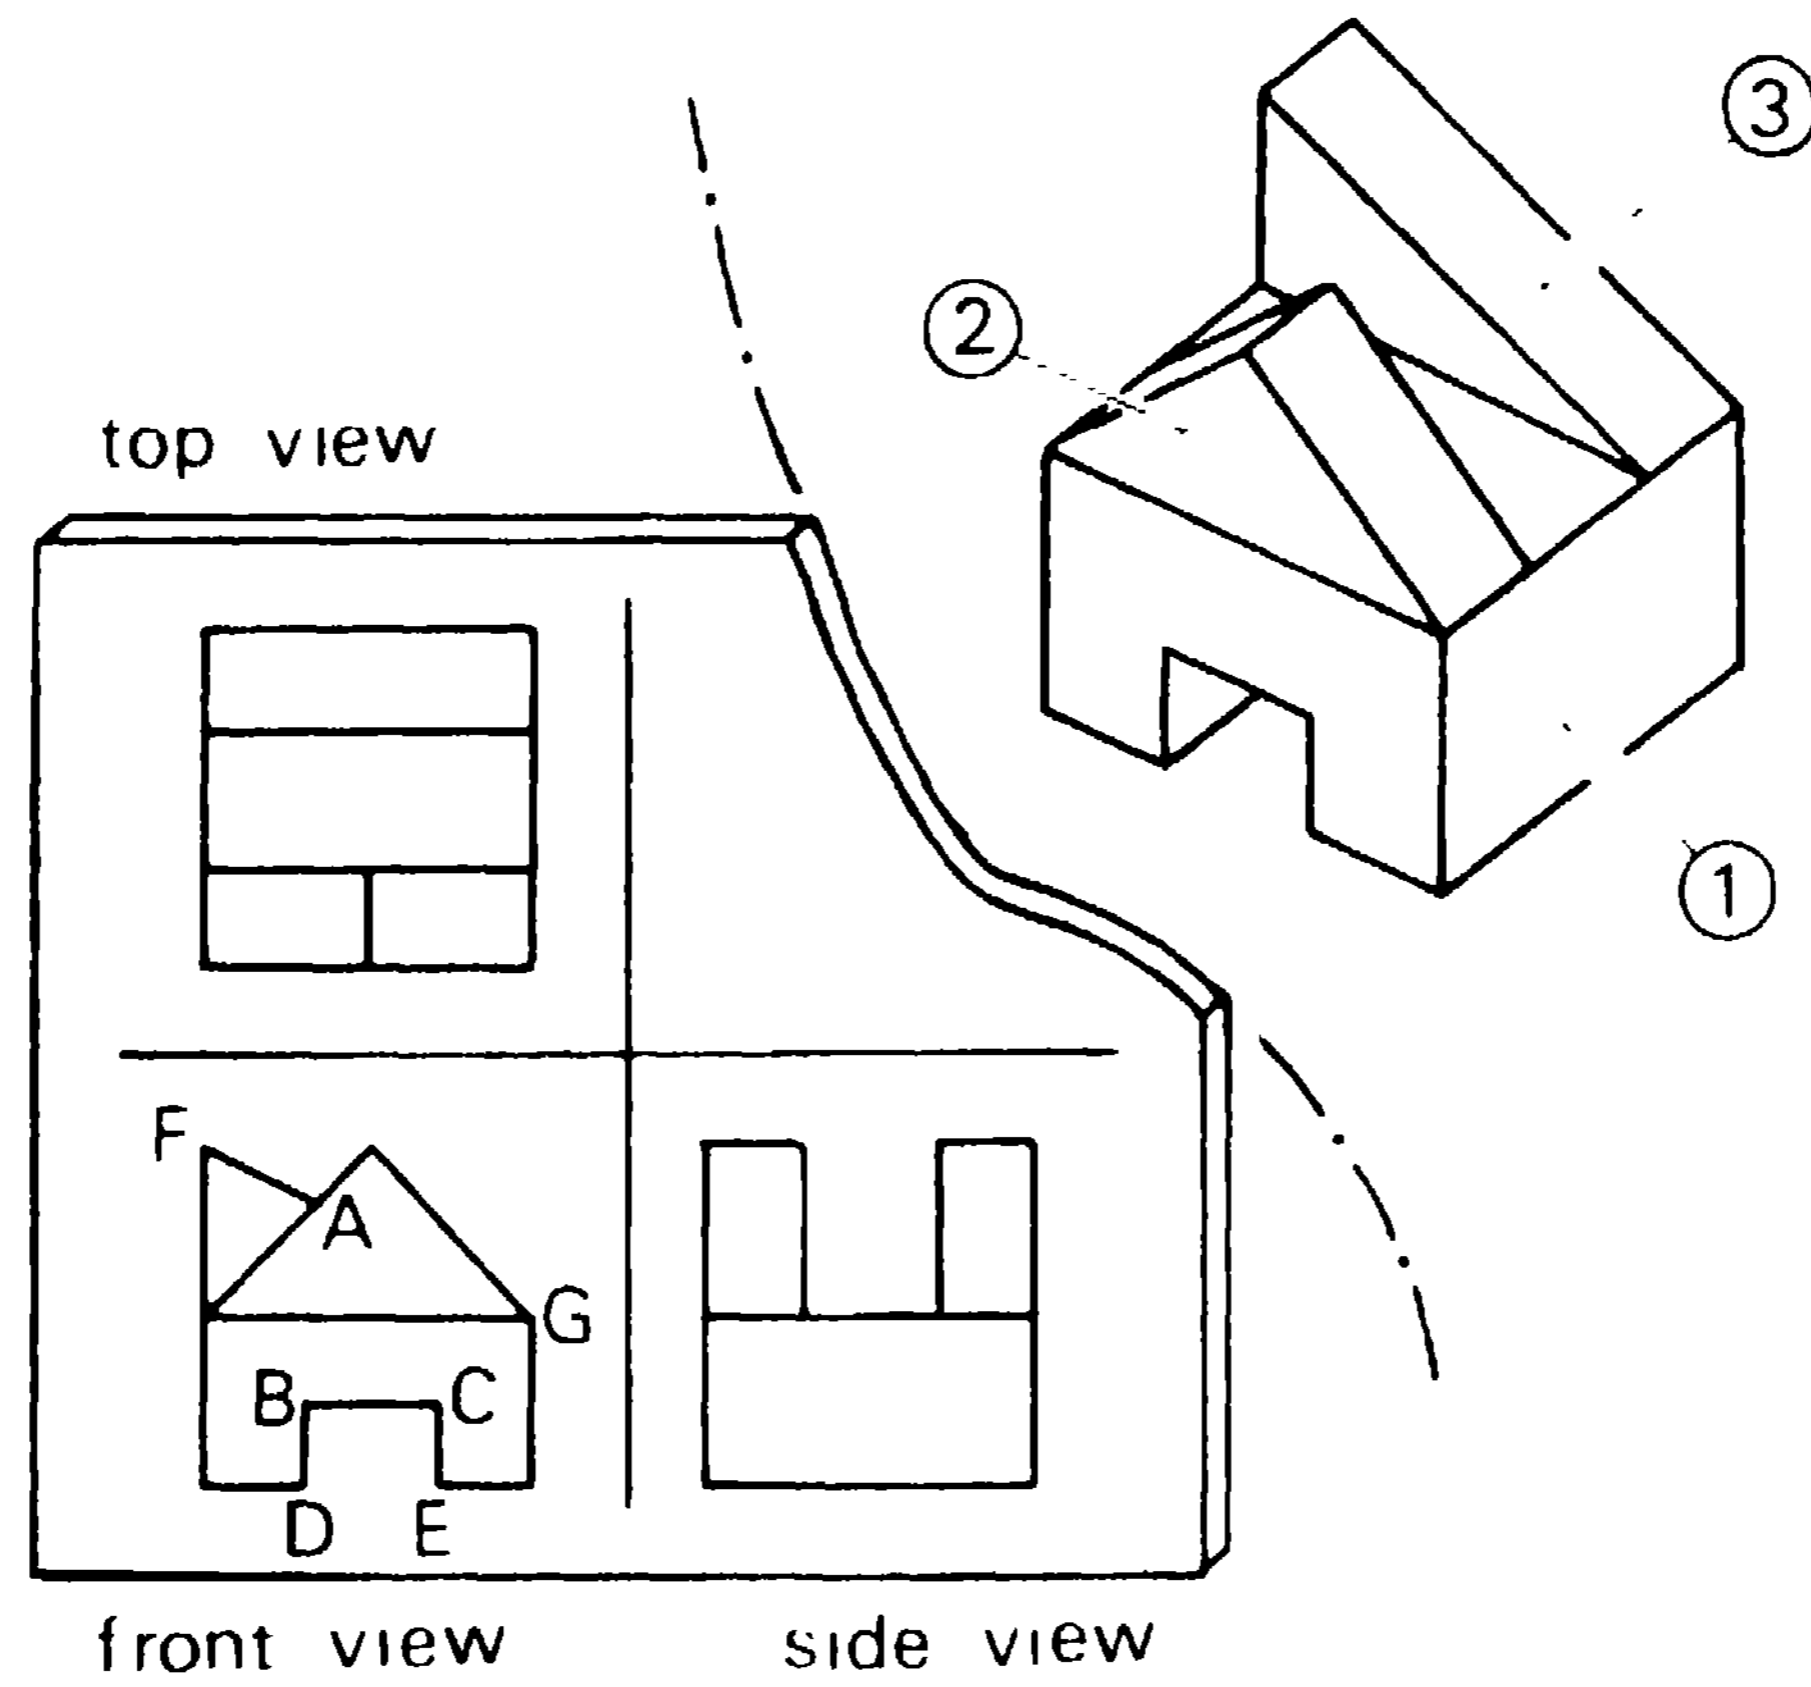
Example of a three-view drawing and its three-dimensional configuration.
